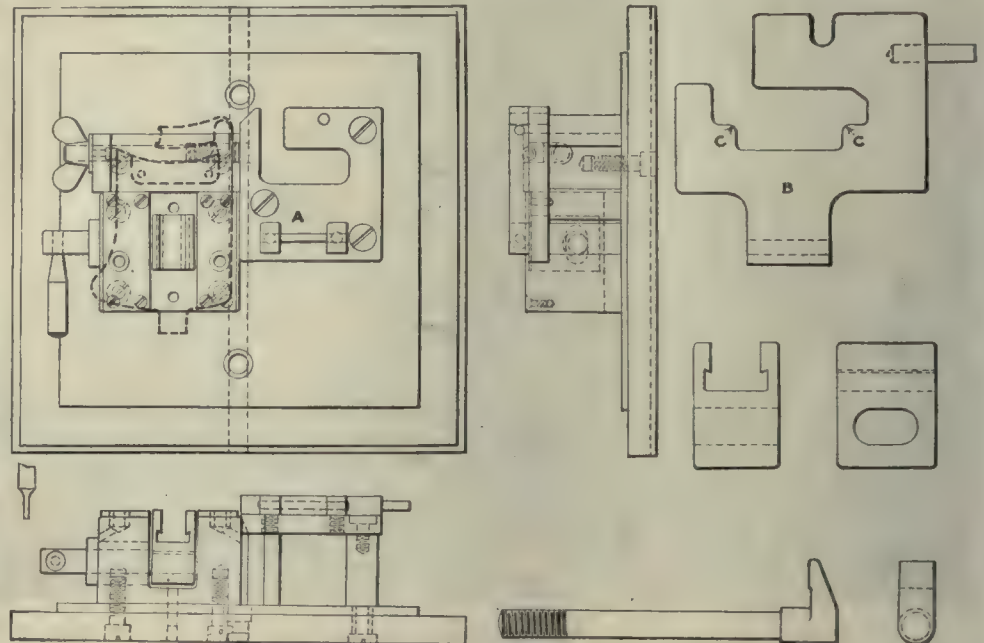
DETAILS OF FIXTURE IN FIG. 78.
